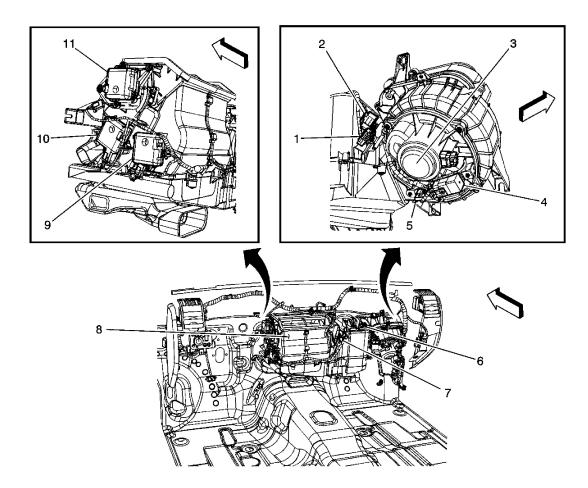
Identifying HVAC Module Components Courtesy of GENERAL MOTORS CORP.
